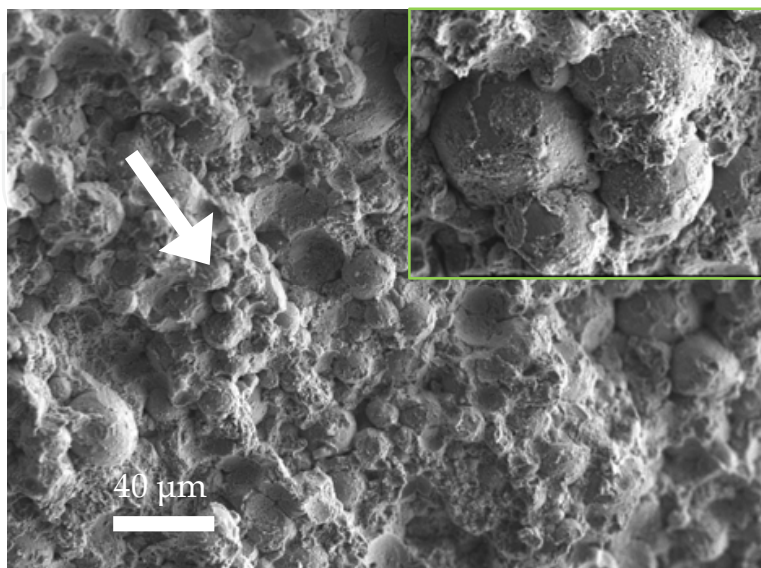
Fracture surface of MCrAlY sample sintered at 1173 K.
